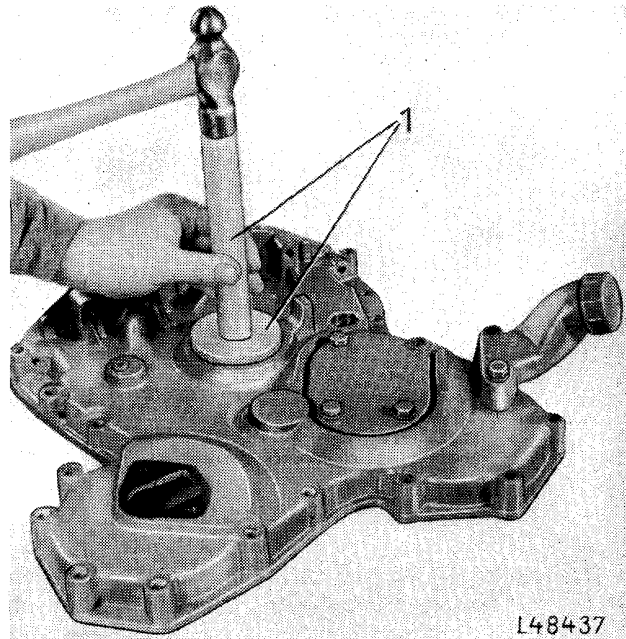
Front Crankshaft Oil Seal in Timing Cover and Oil Seal Driver
